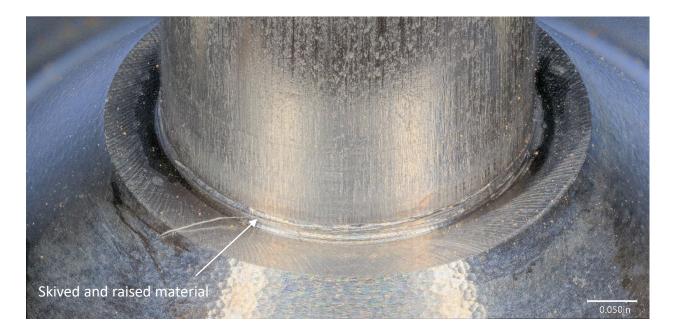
Close view digital microscope image of the base of the bearing shaft where it meets the mount body for the Station 2 tilt slde anti sag roller bearing mount. Note the raised material and skived filament associated with the pressing of the bearing onto the shaft.
